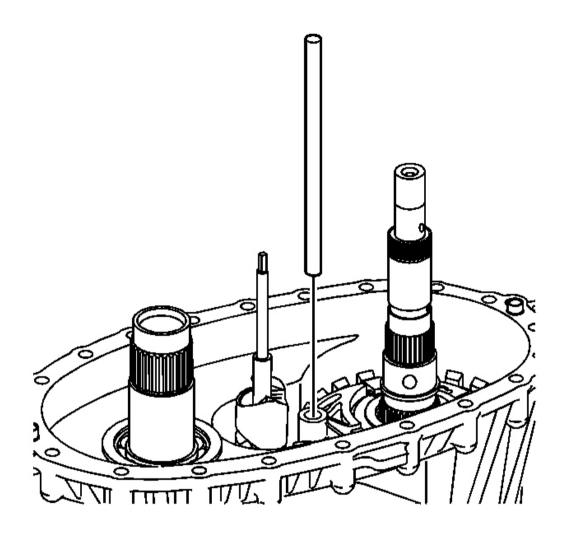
Shift Fork Shaft Courtesy of GENERAL MOTORS CORP.
